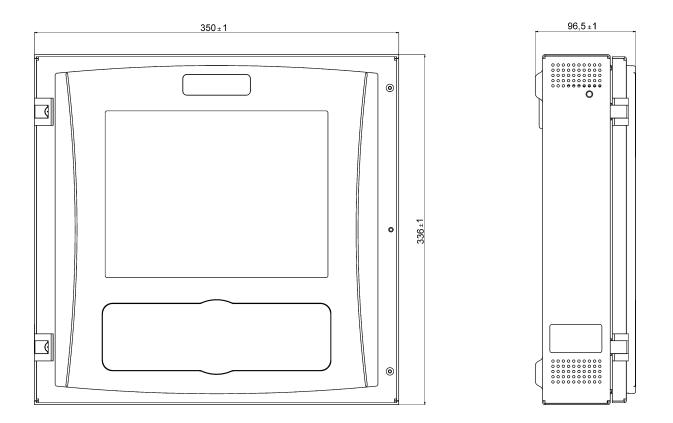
/1 OS-61 housing for PSF-60 panel - view and dimensions
